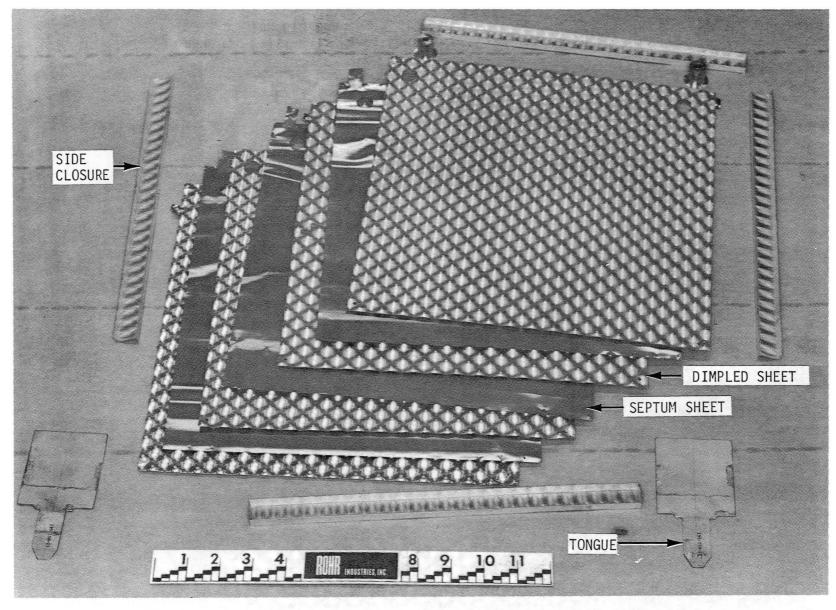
Detail Parts for Panel Having Thru Panel Fasteners and Tongues
